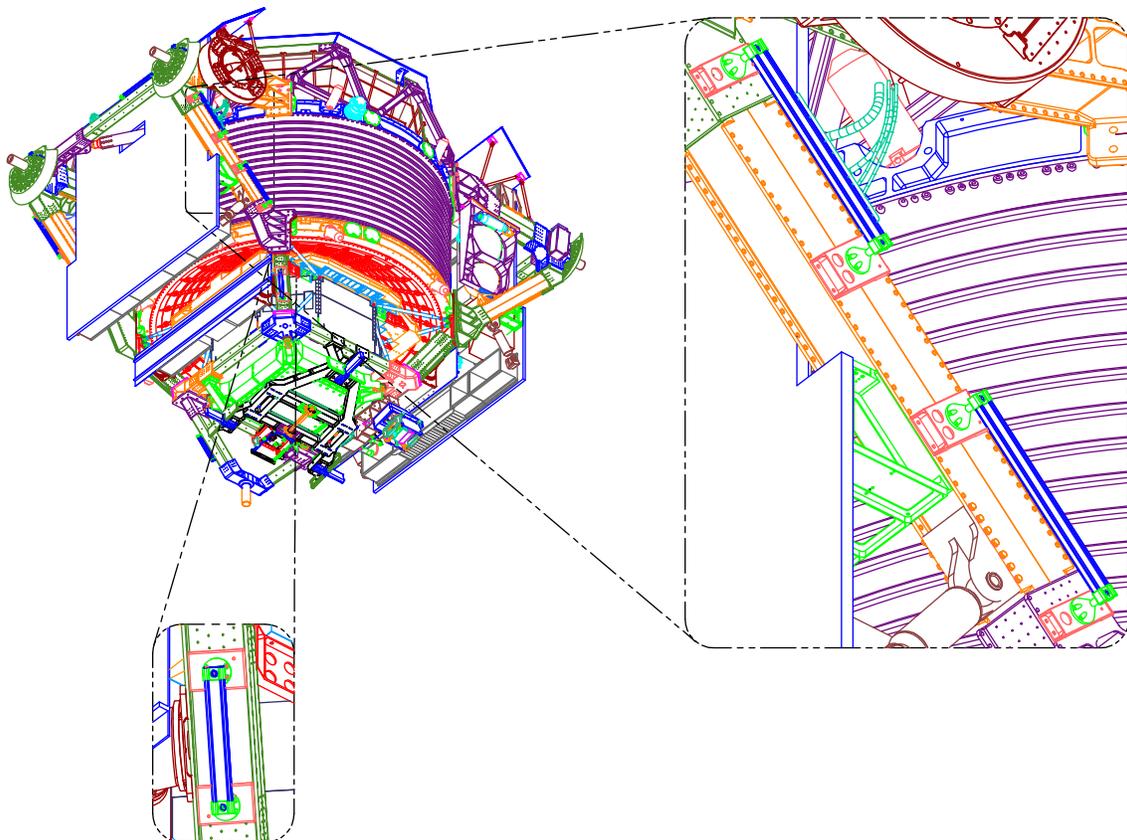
EVA Handrails Used To Access WIF Socket On-Orbit
